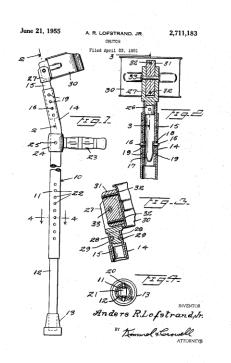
Upper and Lower Member Adjusting Forearm Crutch (US 2711183)
